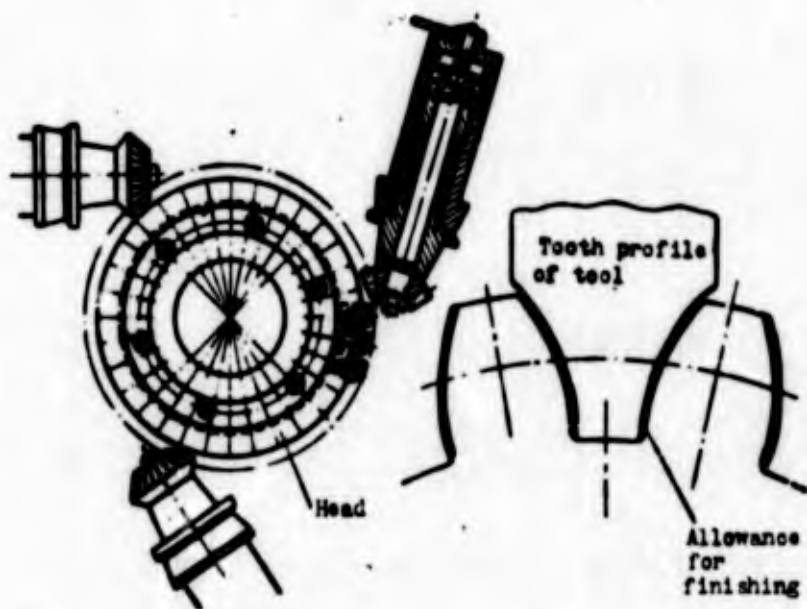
Rough cutting of cavities of bevel gears on a semiautomatic machine with a cutter head.
